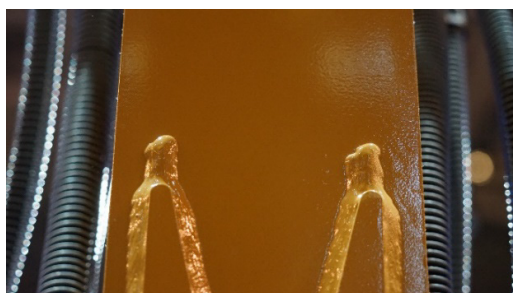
Example for cover plates with extended welds at a cantilever arm of an excavator.
